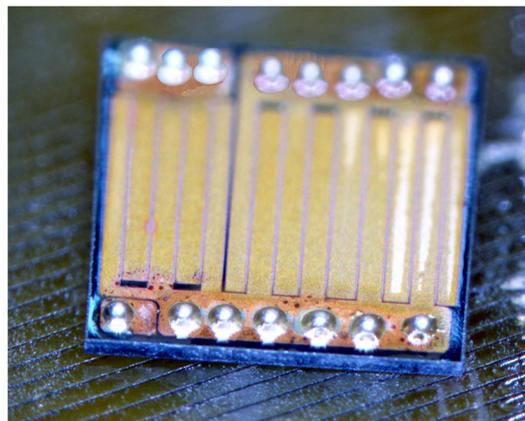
Photography of the GaN IC with manually flip-chip assembly.
